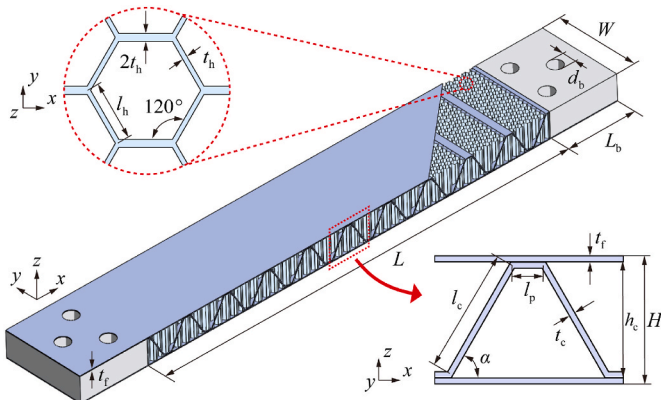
Honeycomb-corrugation sandwich beam specimen.
